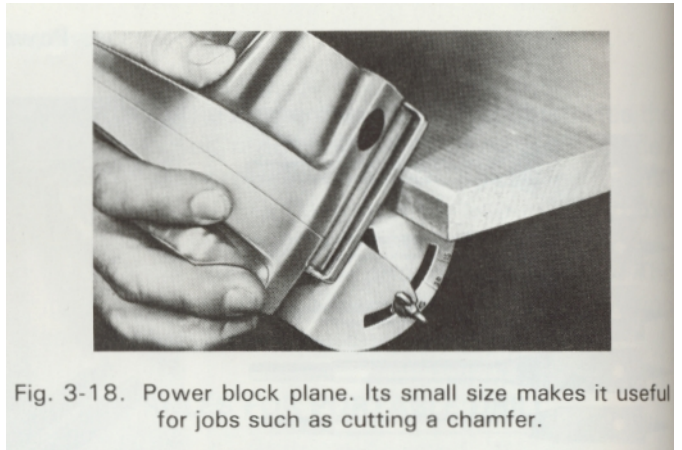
Power block plane. Its small size makes it useful for jobs such as cutting a chamfer.
